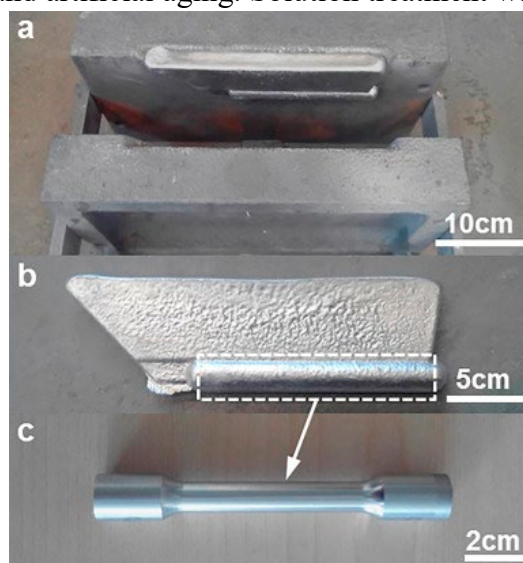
(a) Keel block permanent casting mould, (b) gravity casting made by the mould and (c) machined tensile test bar from the casting.
